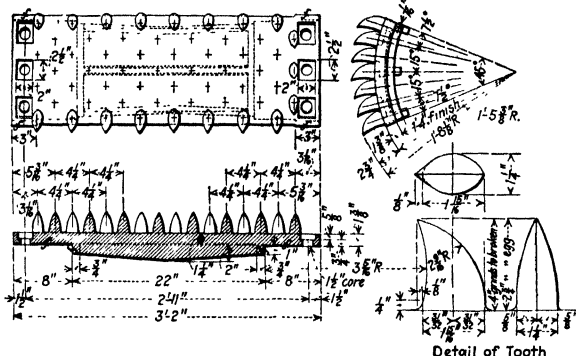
HAWK BILL TOOTH WHICH IS USED TO A LARGE EXTENT IN THE ANTHRACITE FIELD FOR THE CRUSHING OF COAL.
